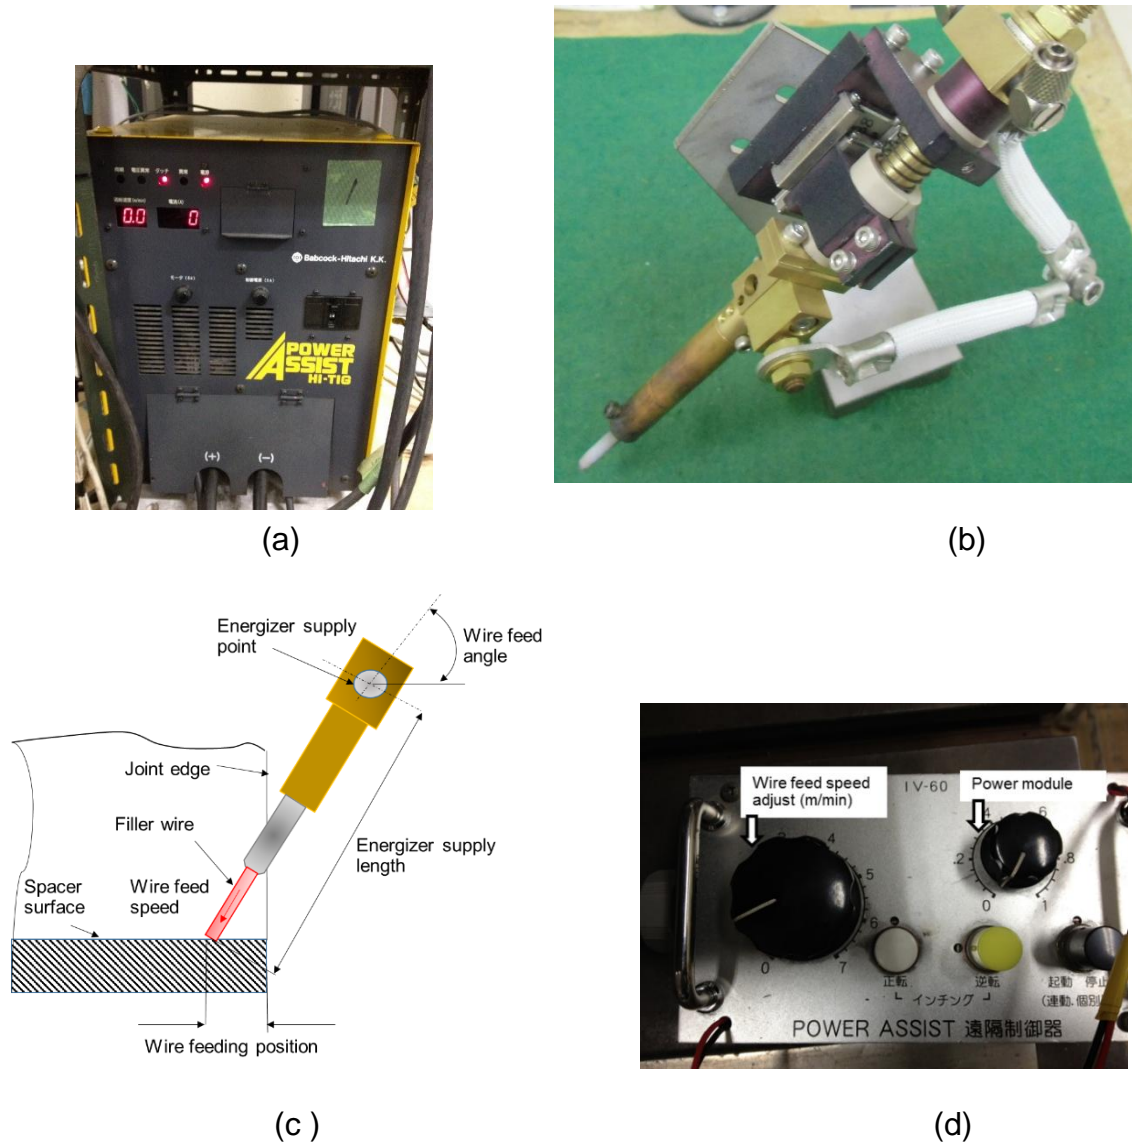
Hot-wire (a) machine, (b) hot-wire torch, (c) hot-wire setup parameters and (d) remote controller
